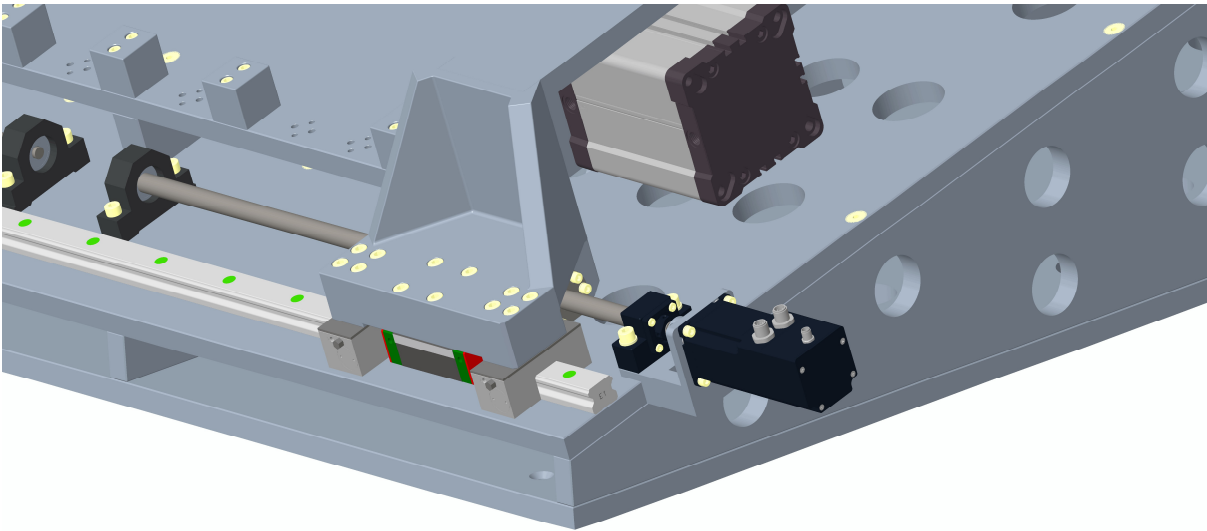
The ball bearing blocks together with the pneumatic clamps mounted on the connecting bridge
